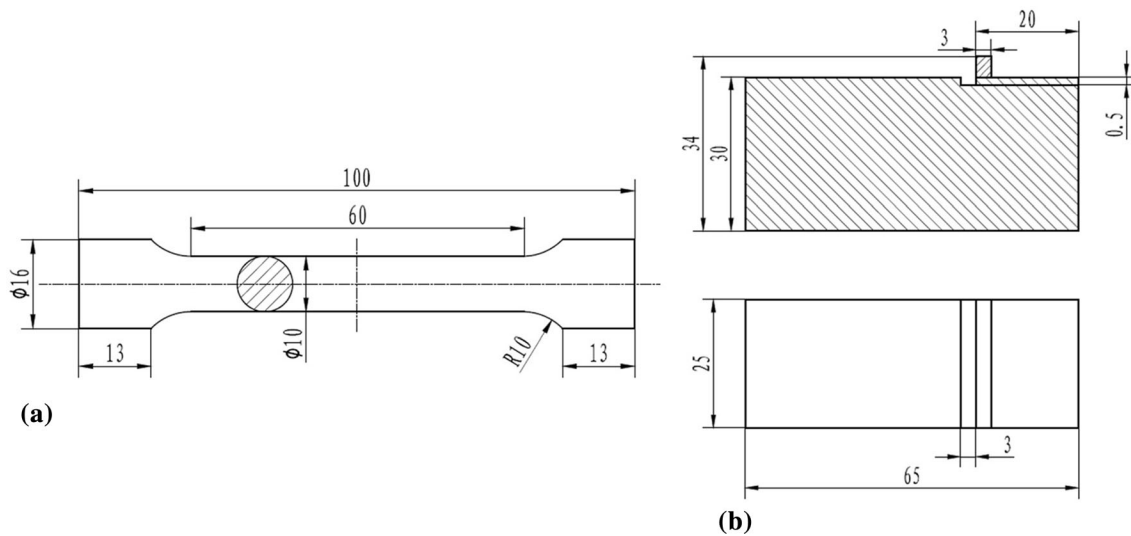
The dimensions of test specimen (unit: mm): (a) tensile test specimen; (b) shear test specimen
